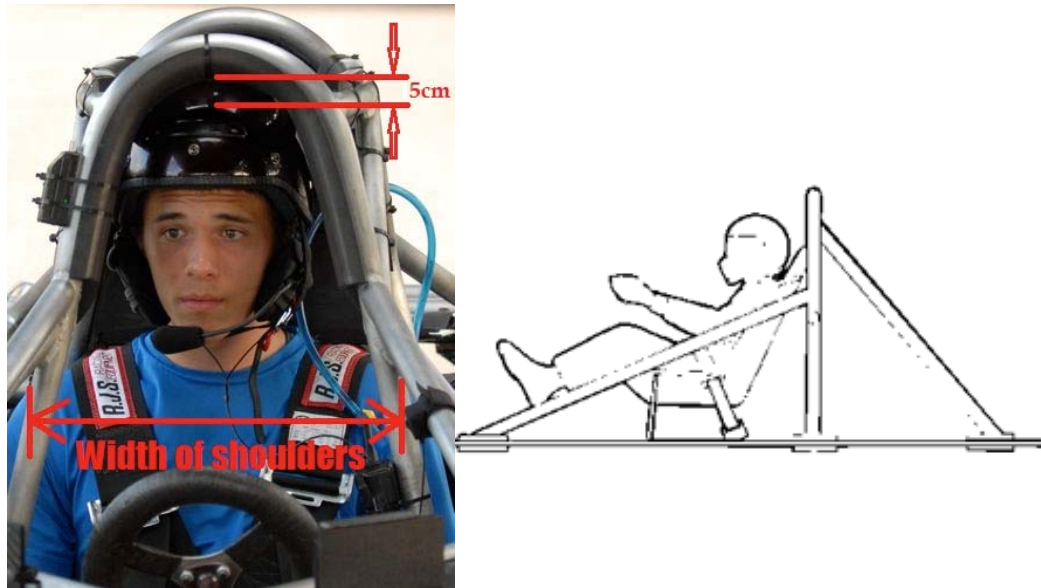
Roll Bar/Cage Design and Dimension Specs
